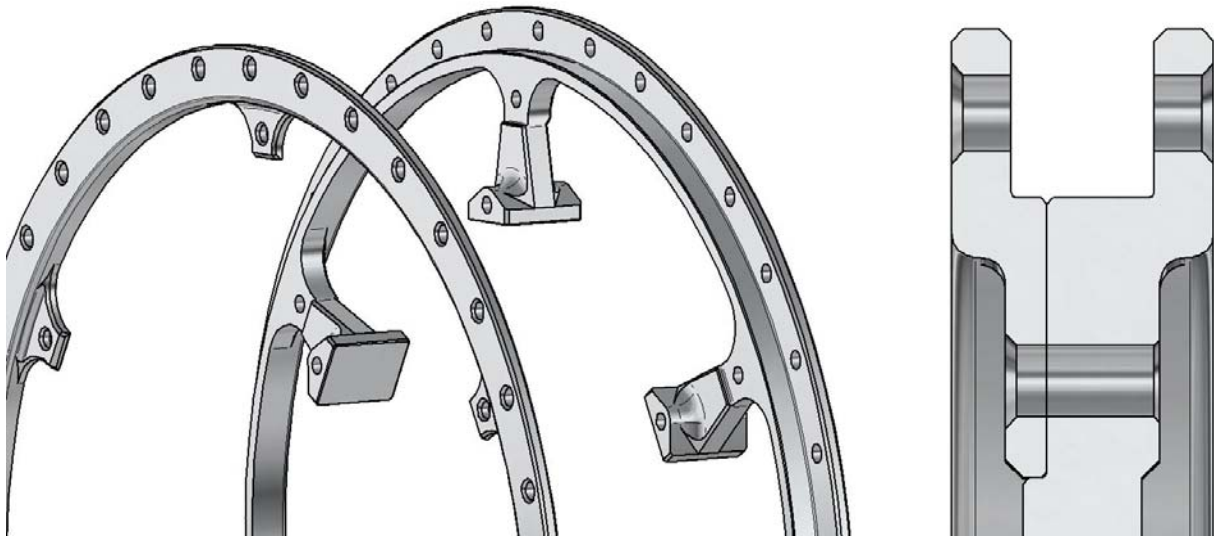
The wheel center is divided into two pieces, when bolted together it forms a symmetrical part attached to the rim.
